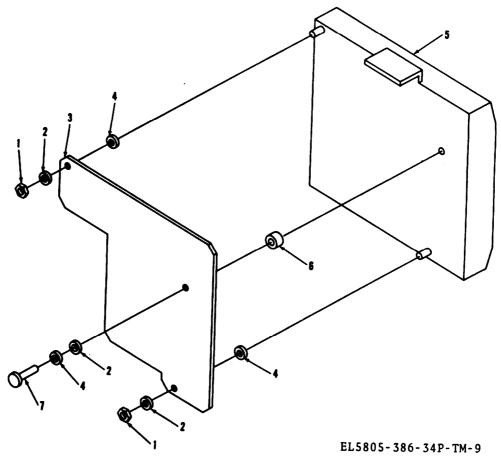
Keysender and oscillator assembly, 1A4A1.
